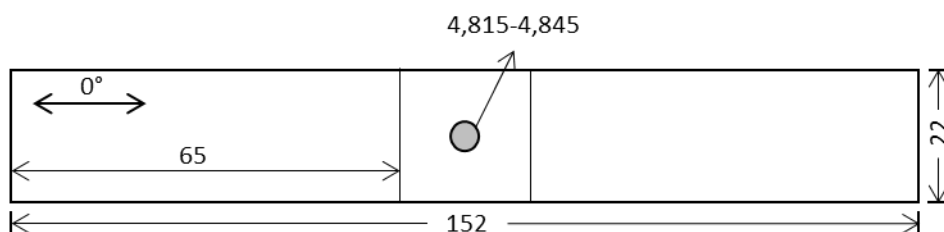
Coupon geometry for filled hole compression test, according to AITM 1-0008. All dimensions are expressed in mm.
